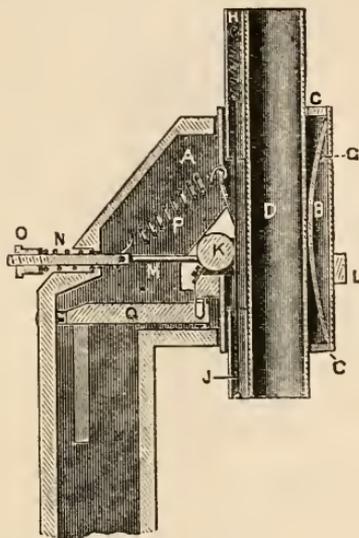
SECTION THROUGH LIMB AND BODY TUBES.
